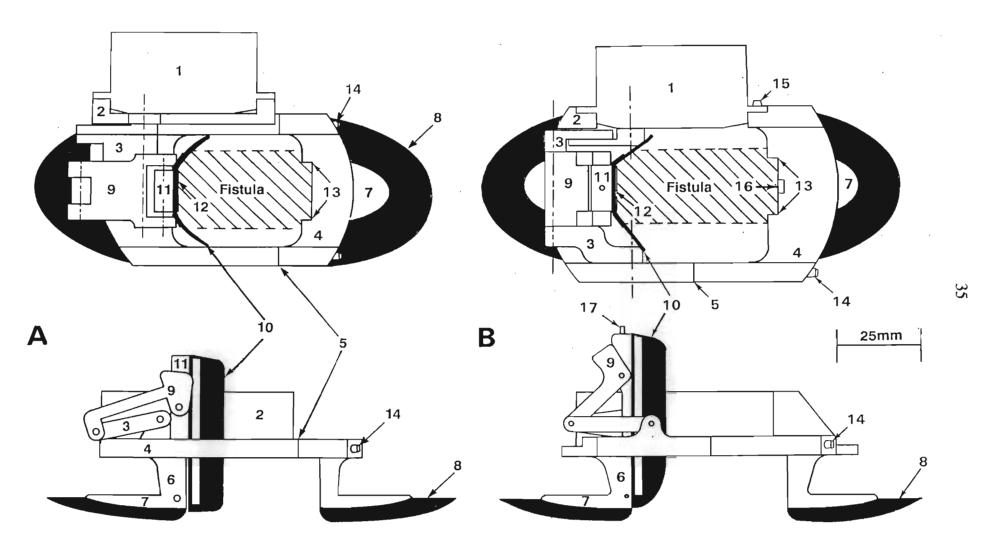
Fistula valve in open position (plan view): (A) prototype [V1] and (B) modified [V2] design, (1) servo motor, (2) motor mounting, (3) drive coupling, (4) outer cannula frame, (5) point of split, (6) strut, (7) projecting wing, (8) oval rubber seal, (9) mechanical linkage with cam, (10) collapsible valve seal with phosphor-bronze strips, (11) valve base, (12) cover plate, (13) groove to fold valve seal, (14) aligning pin, (15) locating pin, (16) stop pin guide, (17) stop pin.
